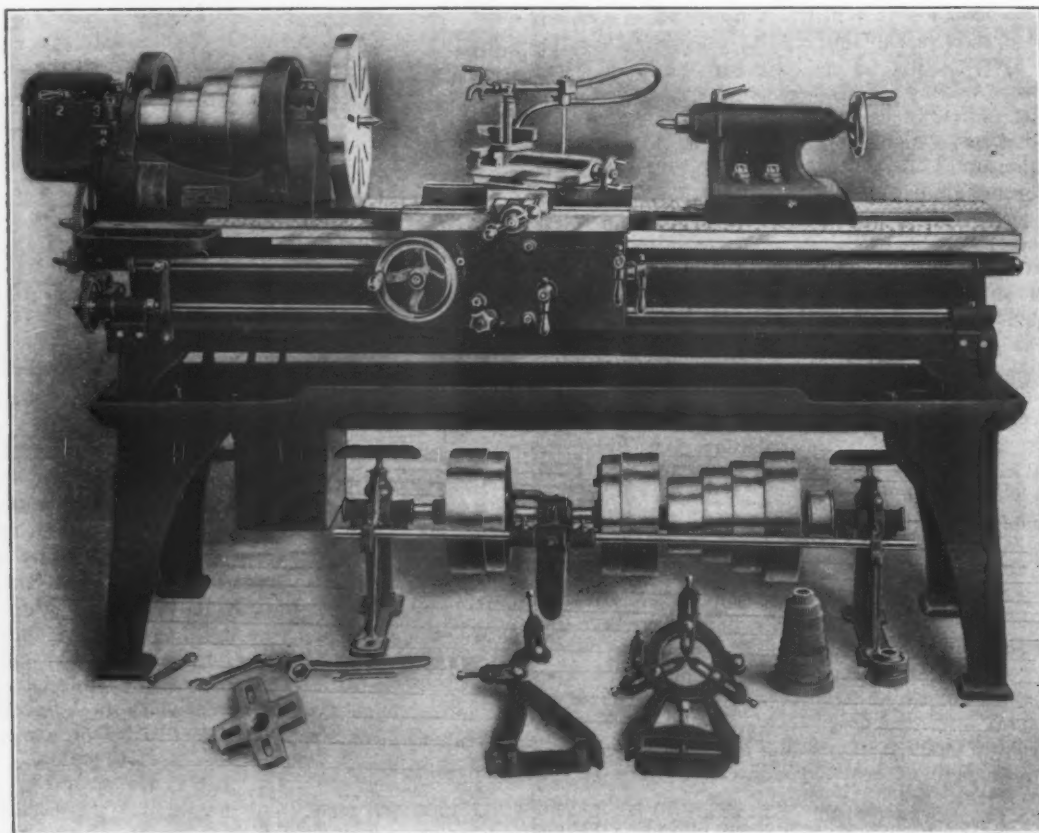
The New 16-In. Engine Lathe Built by the Walcott & Wood Machine Tool Company, Jackson, Mich.
